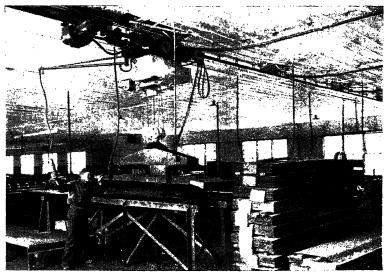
Overhead monorail. This equipment is designed to handle sheet stock. Note the numerous switches to stock piles, the push-button control, and the special sheet holder. (American Mono-Rail.)
